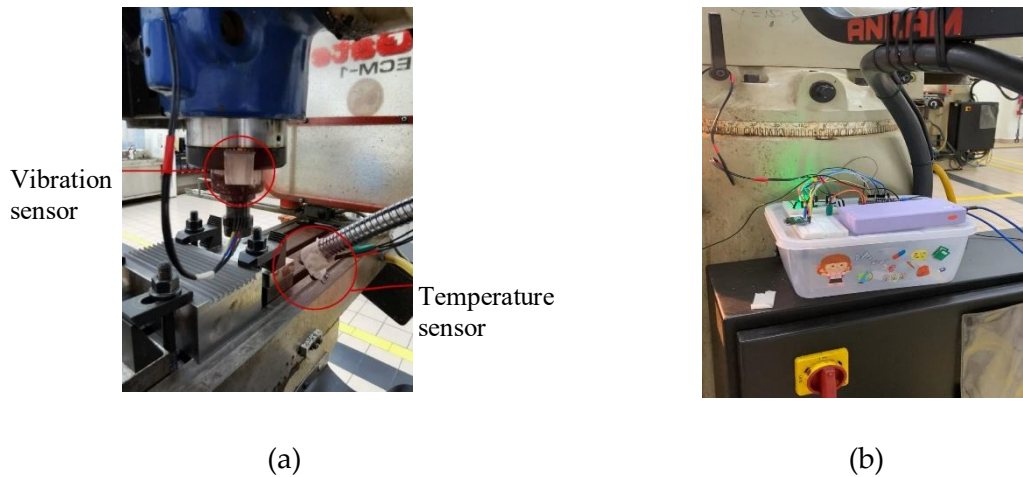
On-machine placement of tool condition monitoring system on CNC milling machine (a) Positioning of vibration and temperature sensors (b) Setup of Arduino based microcontroller system
